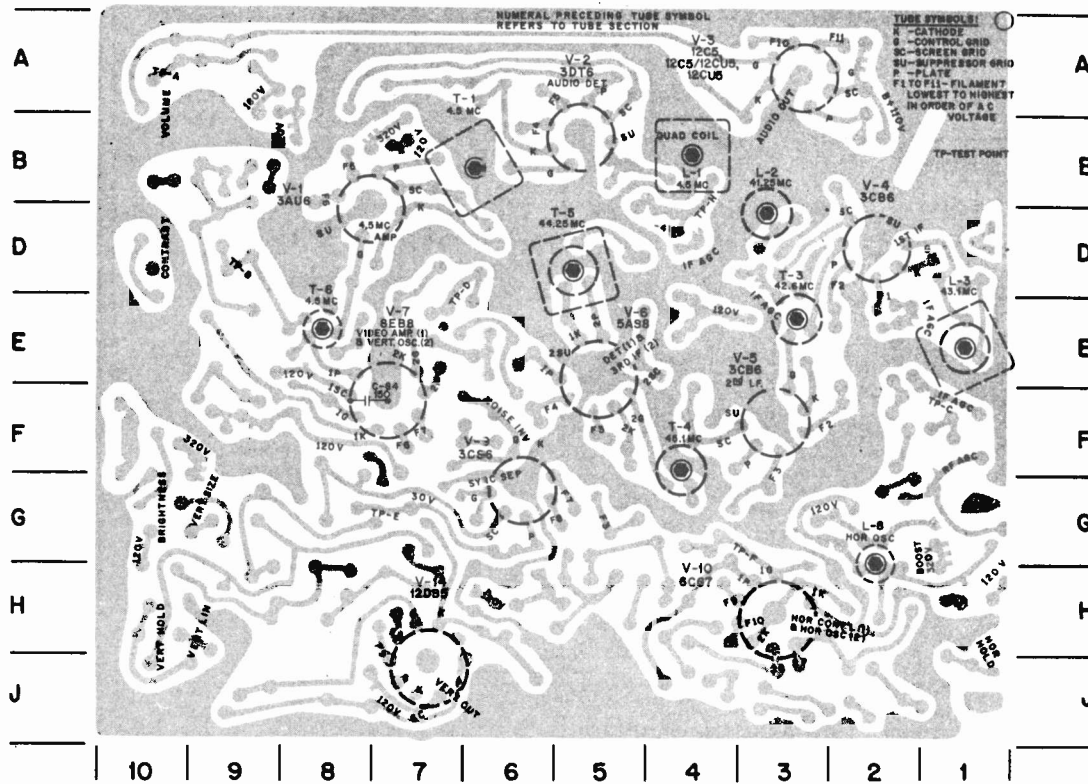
Etched Printed Circuit Board Chassis (Bot. View)
